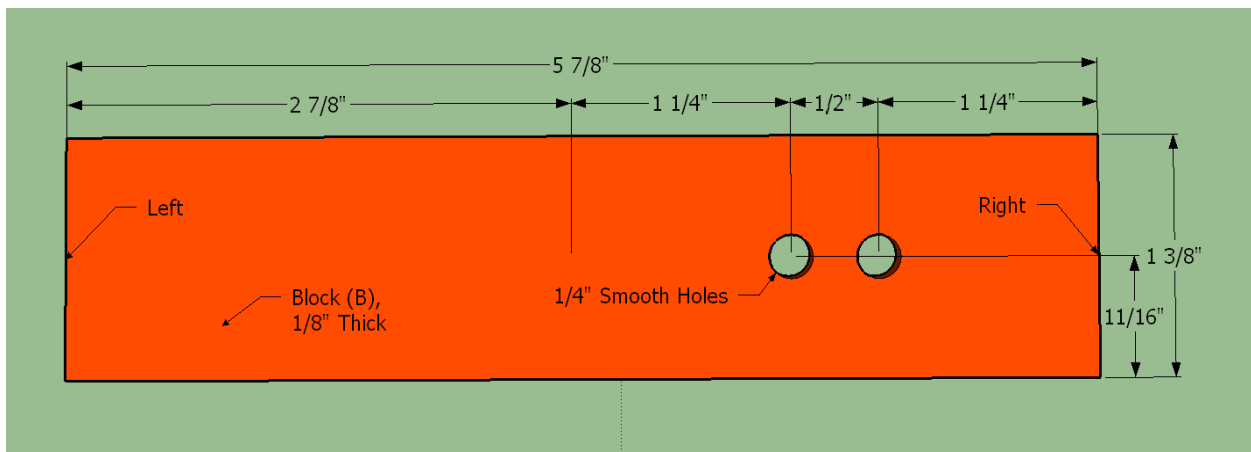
Block (B)- Sample Holder of Rectangular Specimens.
